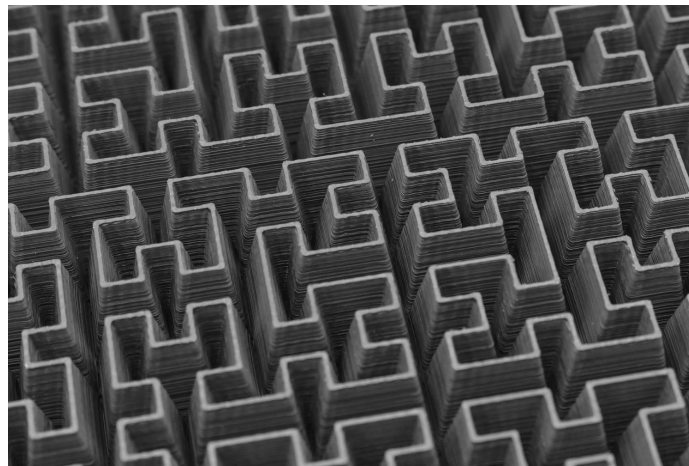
A detailed view of the prototype absorber is shown. Layer lines from the 3D printing process are visible.
